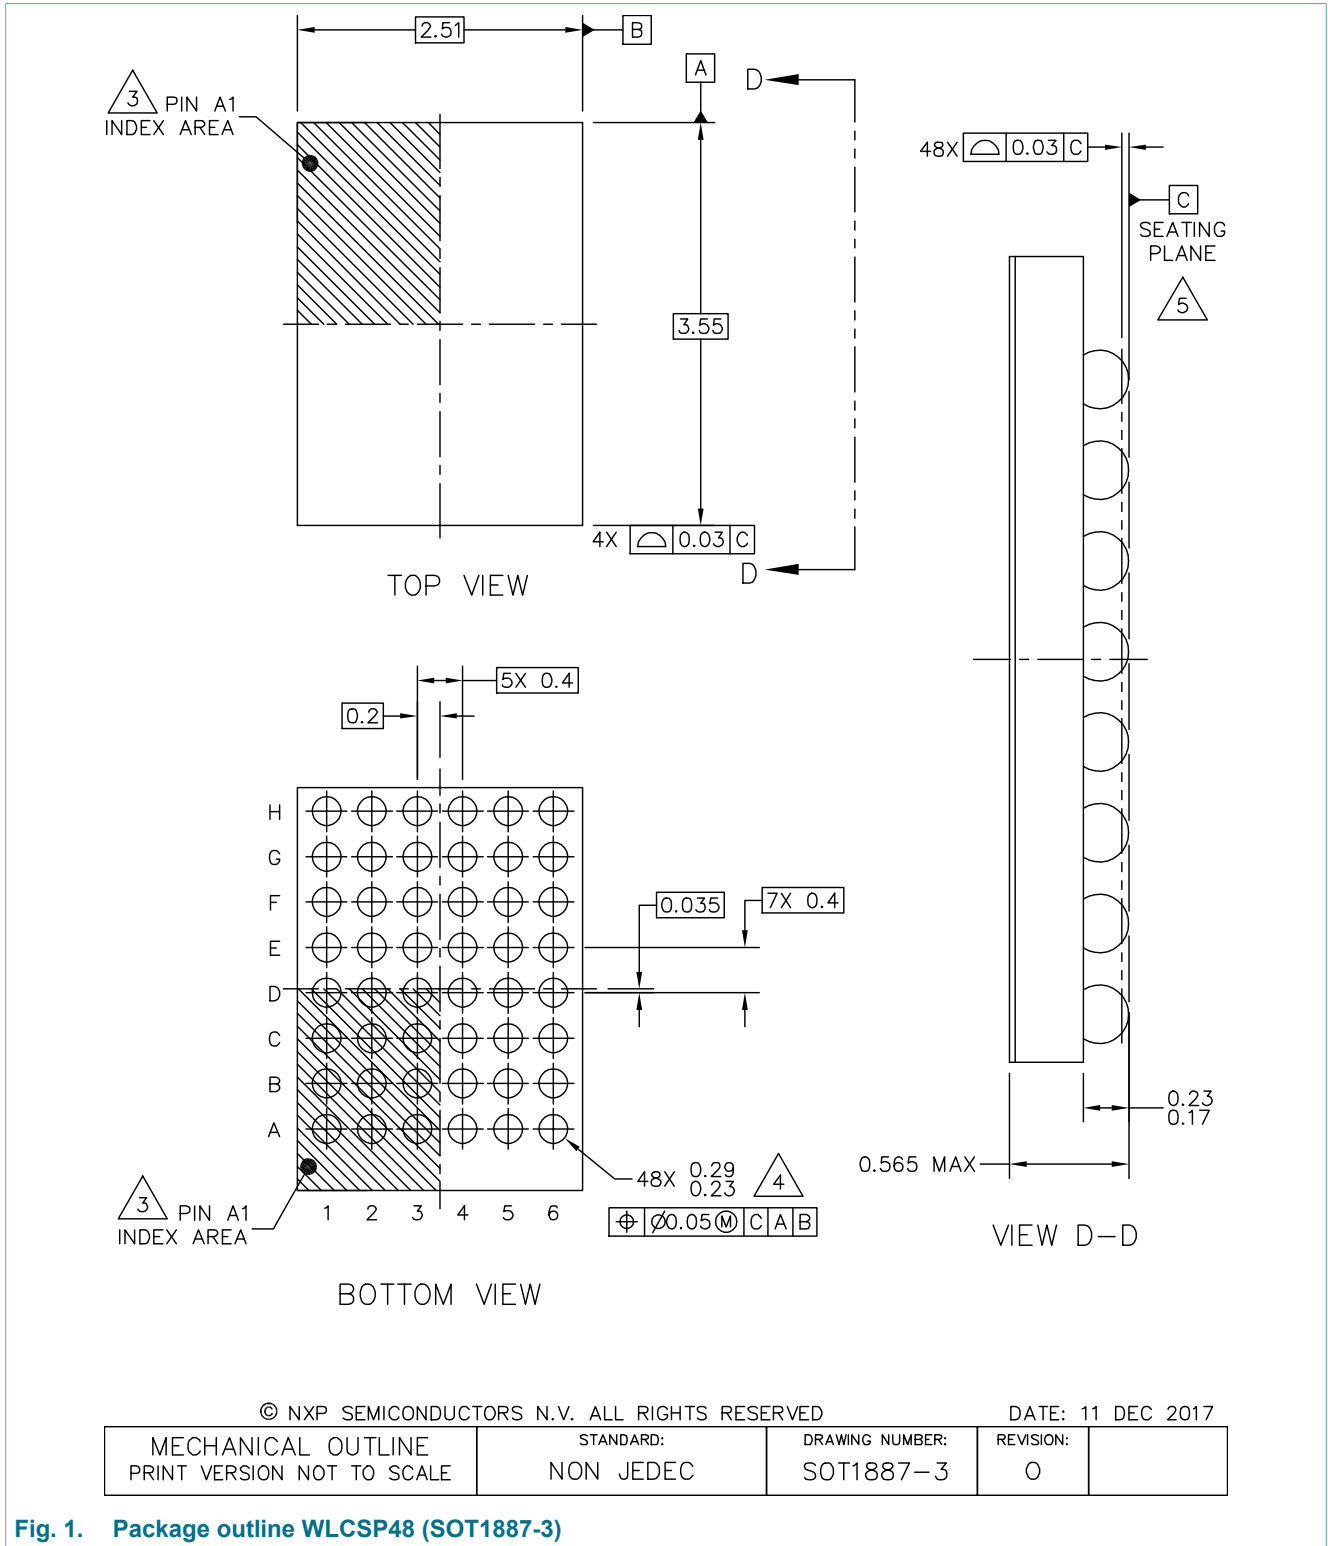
Package outline WLCSP48 (SOT1887-3)
